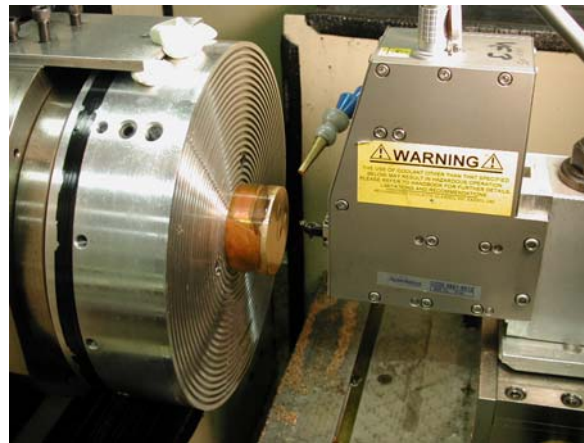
Fabricating off axis sphere on copper blank using the ASG 2500 DTM
